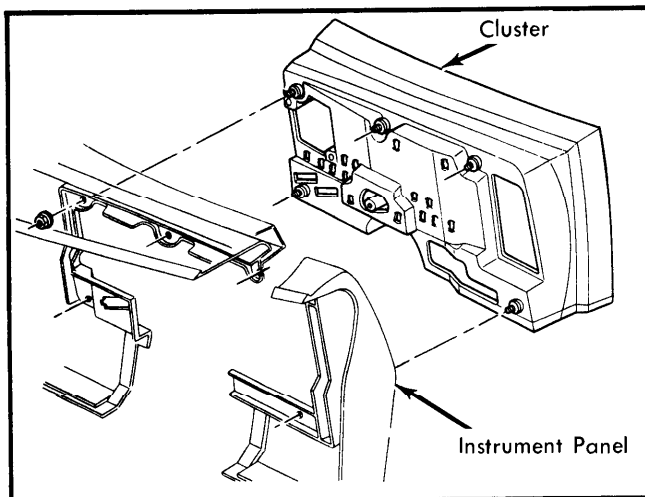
Malibu and Monte Carlo Instrument Cluster Assembly
